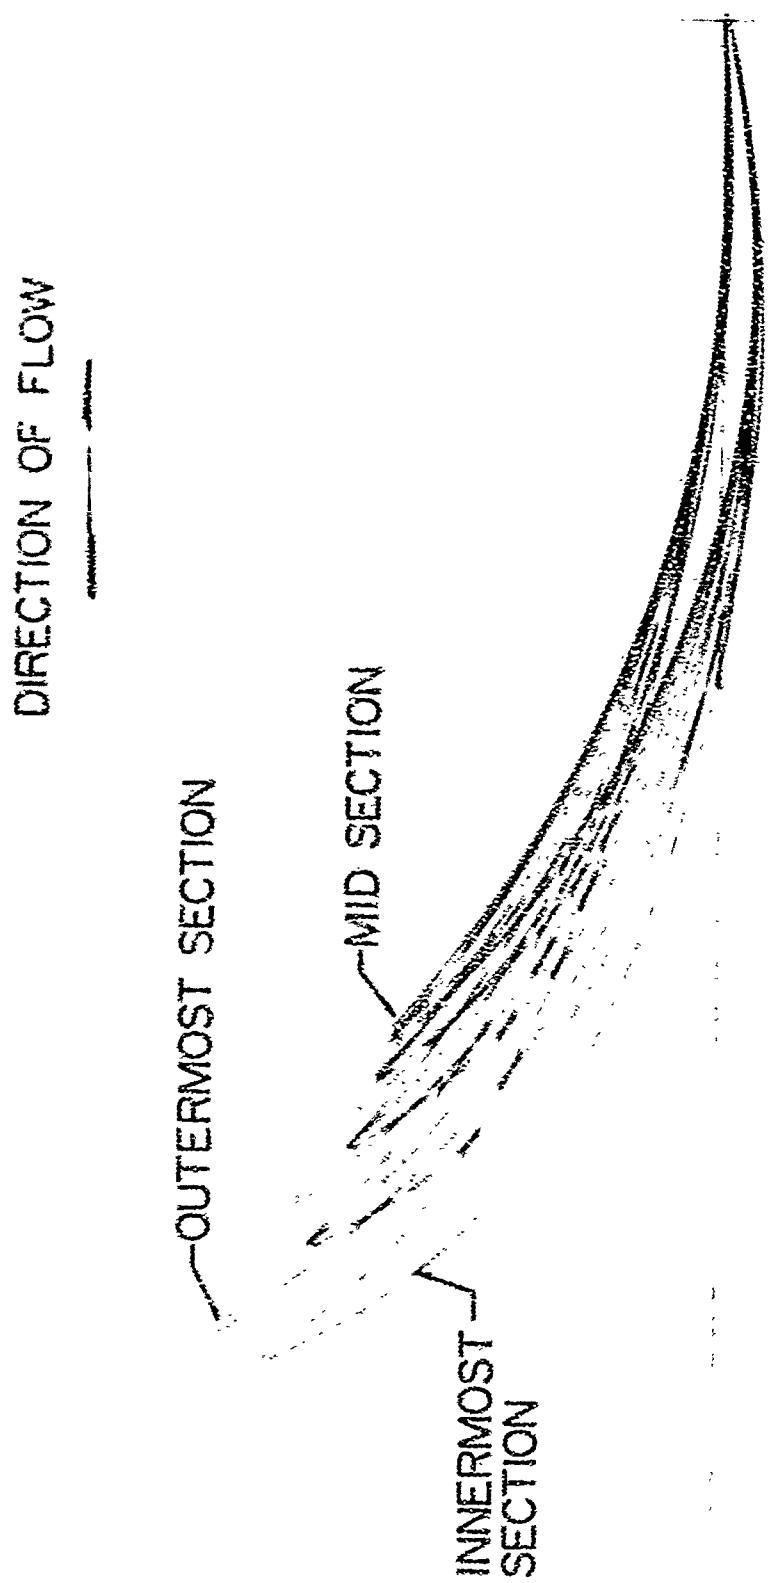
Surge Impediment Plot of Stator blade section (Manufacturing) Section:
